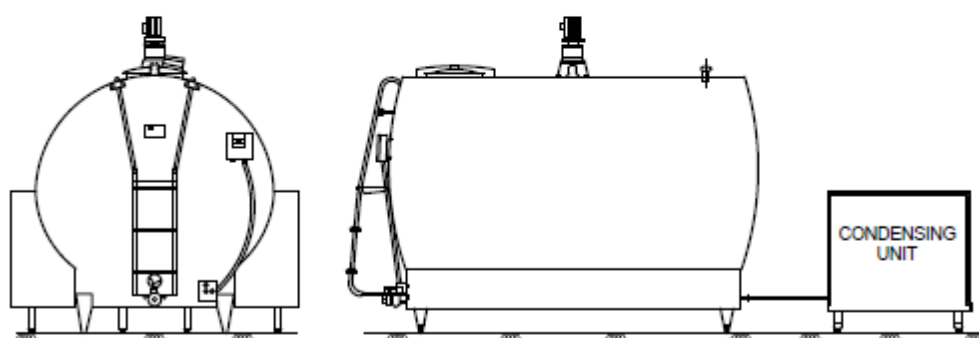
B CLOSED TYPE BULK MILK COOLING TANK
